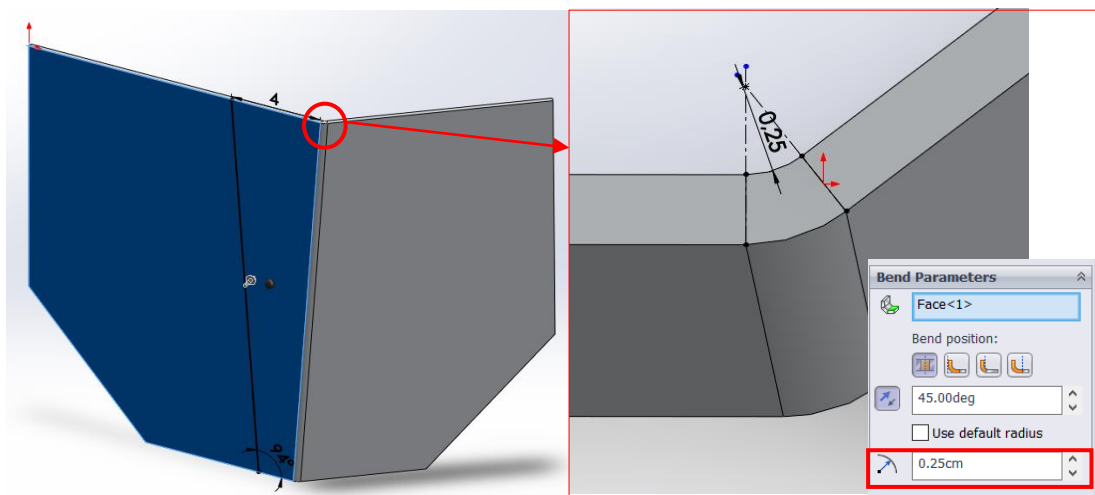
SolidWorks® *Sketched Bend* tool used to create a bend on the shank structure sheet metal, with the bend radius parameter defined accordingly to the manufacture requirements of Orthos XXI.
